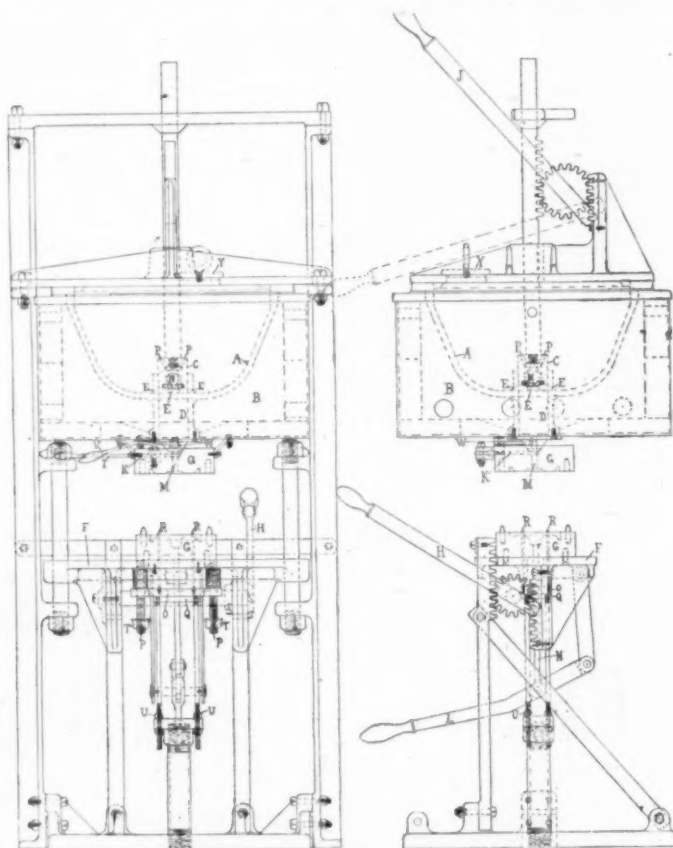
ONE OF THE LATEST TYPES OF DIE-CASTING MACHINES.
